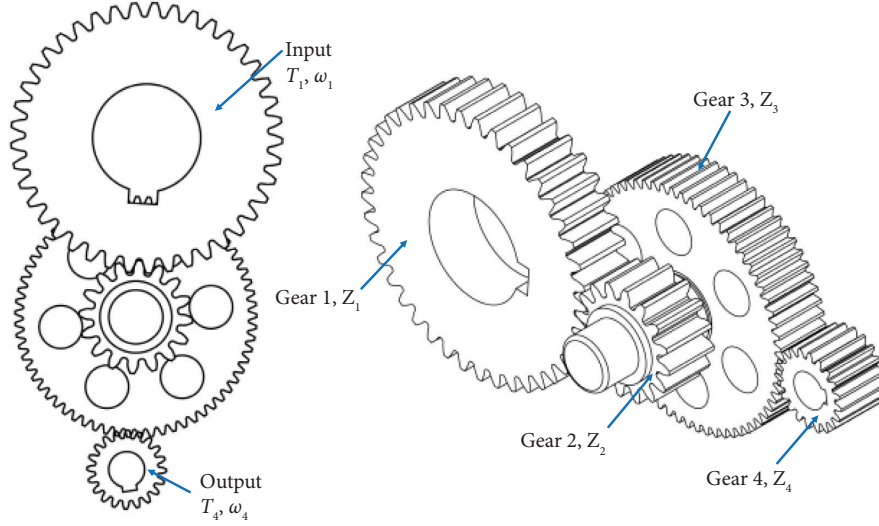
Configuration of gears in a typical two-stage gearbox.
